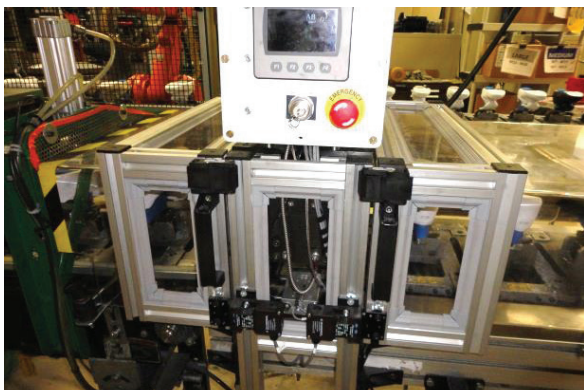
Machine Enclosure Preventing Contact with Moving Parts
